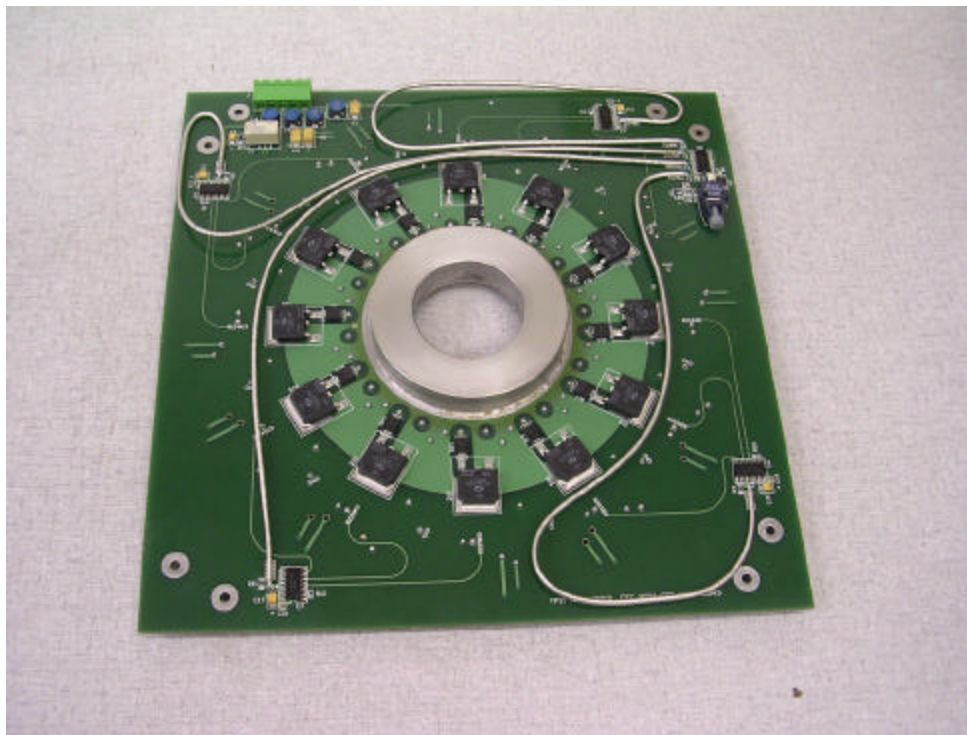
Completed modulator board. Lower side showing ferrite in center and semirigid coax cables for signal distribution.
